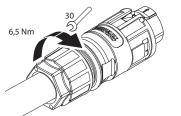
Tighten screws on the housing Fig. 22: Tighten the cable screw fitting
